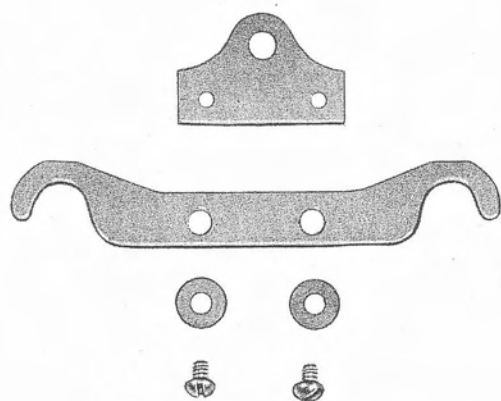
Old type bottom shaft bearing and holder (exploded view).
